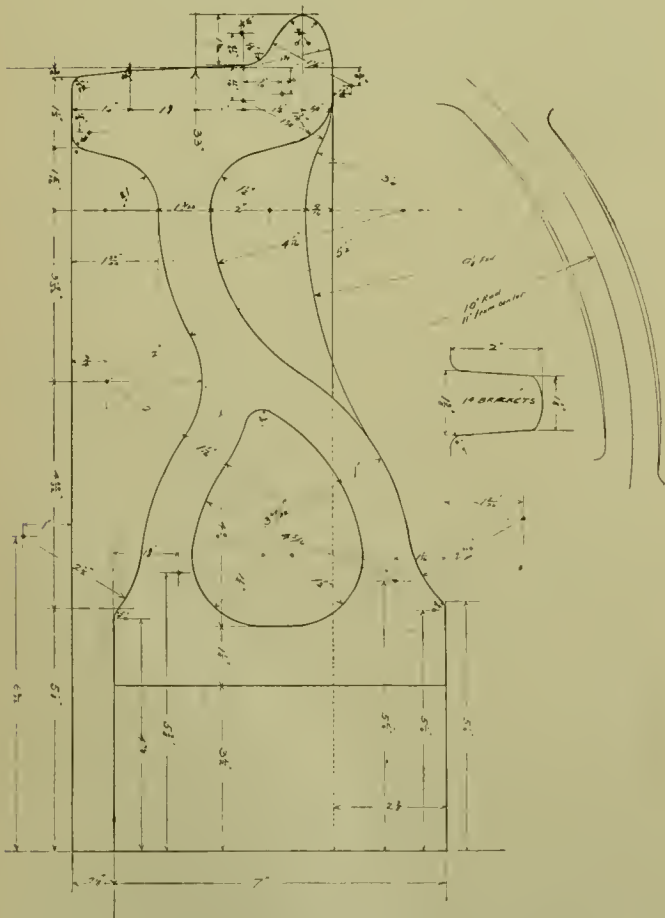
33 IN. 700-LB. CAST IRON WHEEL FOR 100,000-LB. CARS.
